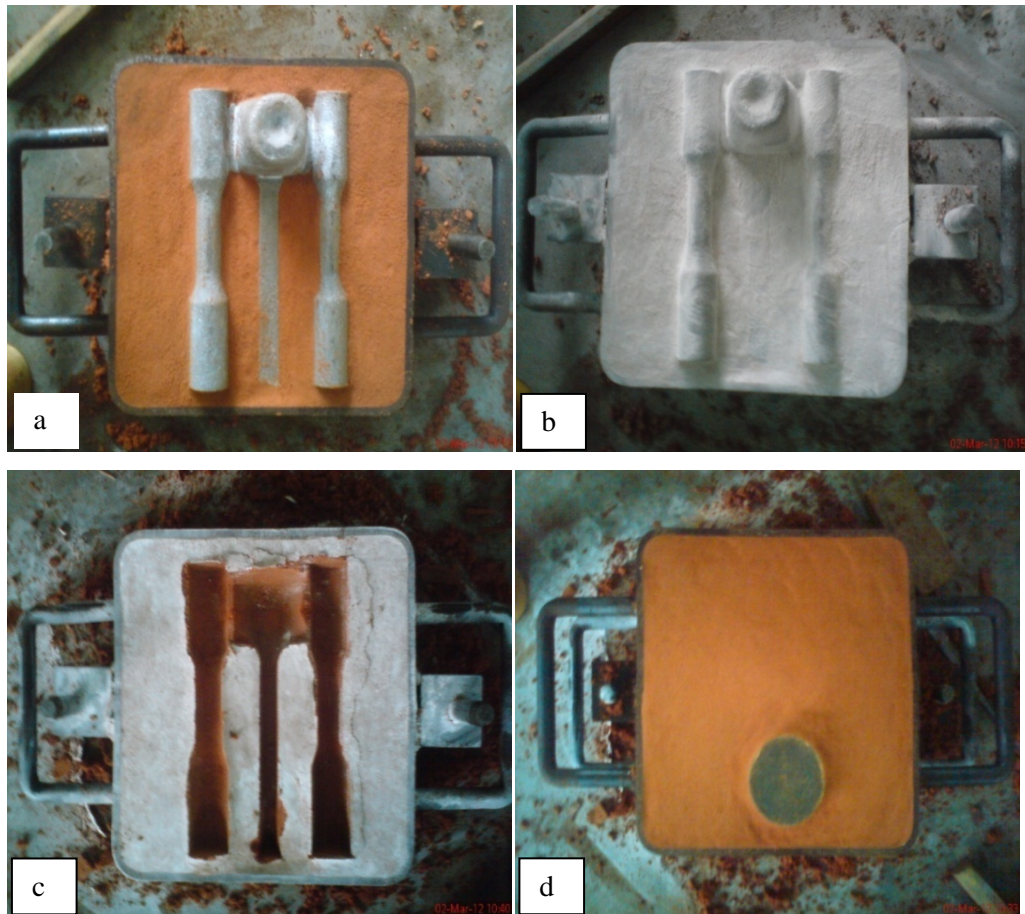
shows the process of making the mold. Parting powder (white powder in Figure 3.3b) was used to ease the process of separating the cope and drag before removing the pattern, leaving a cavity with the shape of the pattern. Four (4) sets of mold were made for this experiment, which produces eight (8) cylindrical dog bone tensile test specimen in which two (2) of the specimen is made as spare should any unwanted event that requires the actual specimen to be replaced occur.
